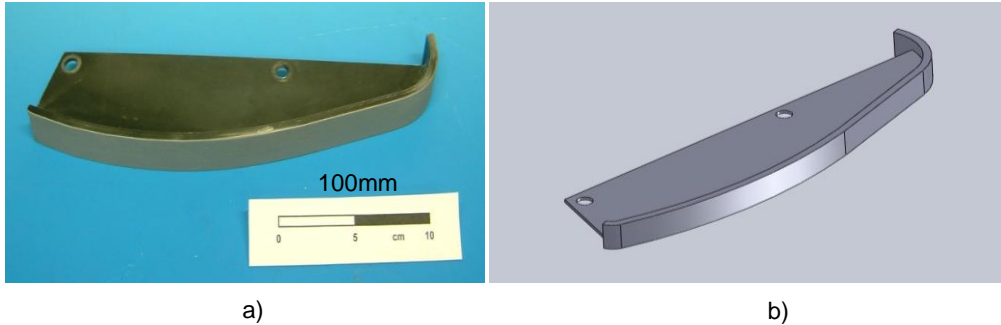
Blade for printing industry, the real one (a) and a CAD format (b).
